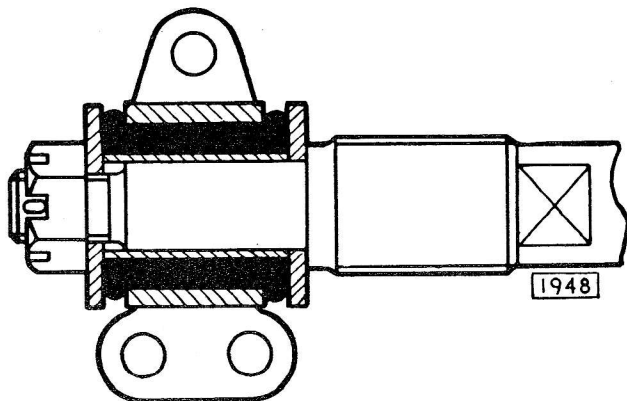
Section through one of the upper wishbone rubber/steel bushed mounting brackets.
